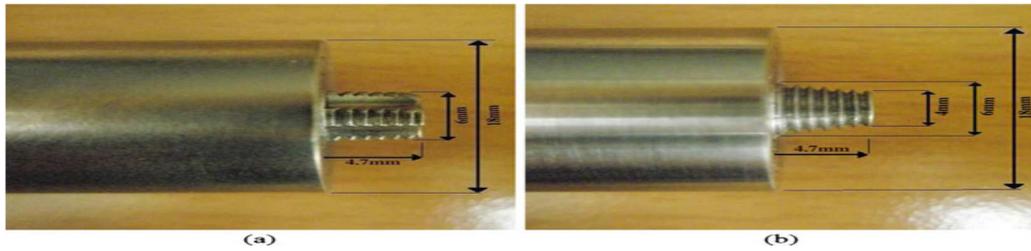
the geometries of tools (a) threaded 4-flute tool (b) threaded taper tool [5]
